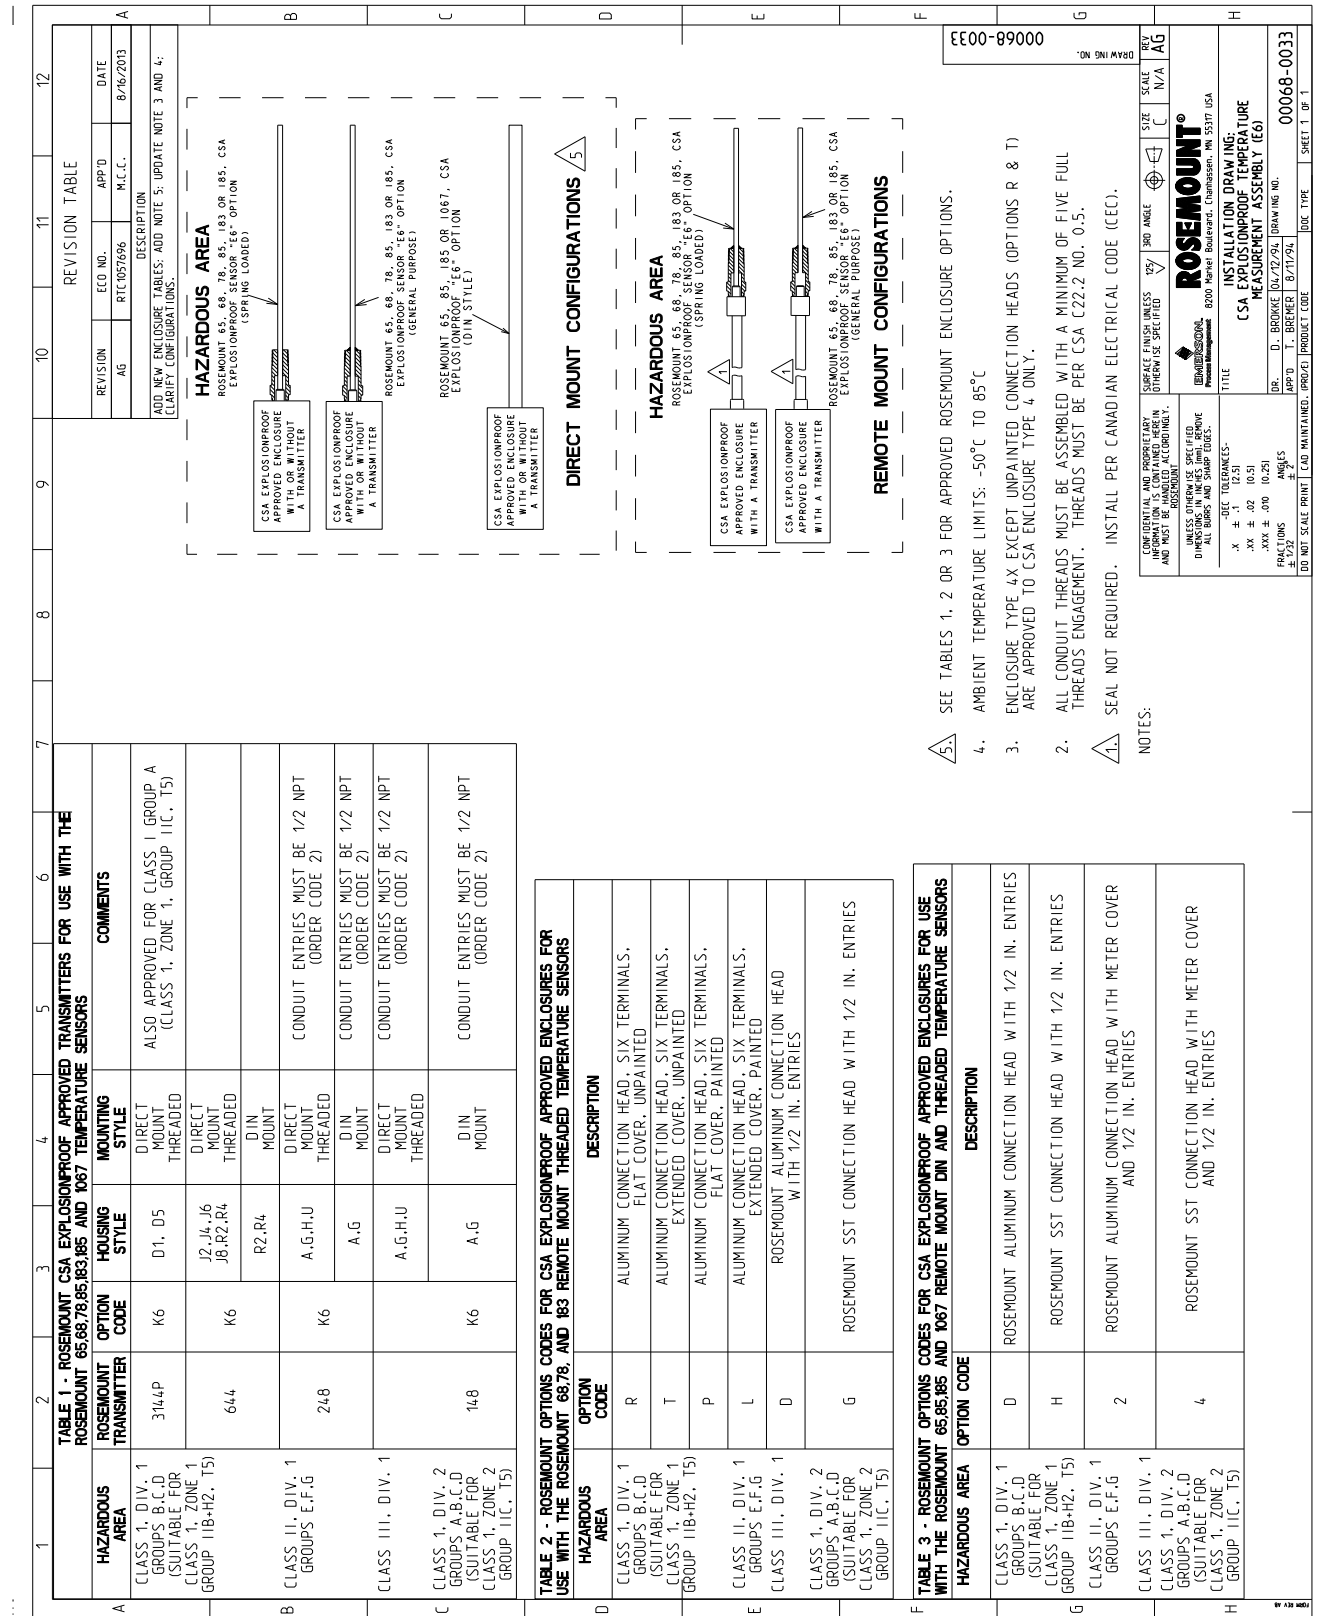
CSA Explosionproof Temperature Measurement Assembly (E6) Installation Drawing 00068-0033, Rev AG.
